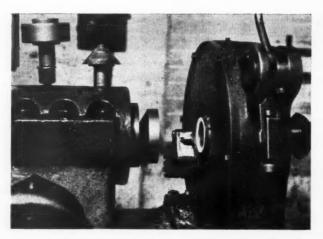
Machine for flanding copper pipe and tub-ing. With this equipment a flange can quickly be rolled back to a 45-deg. angle in reverse.
